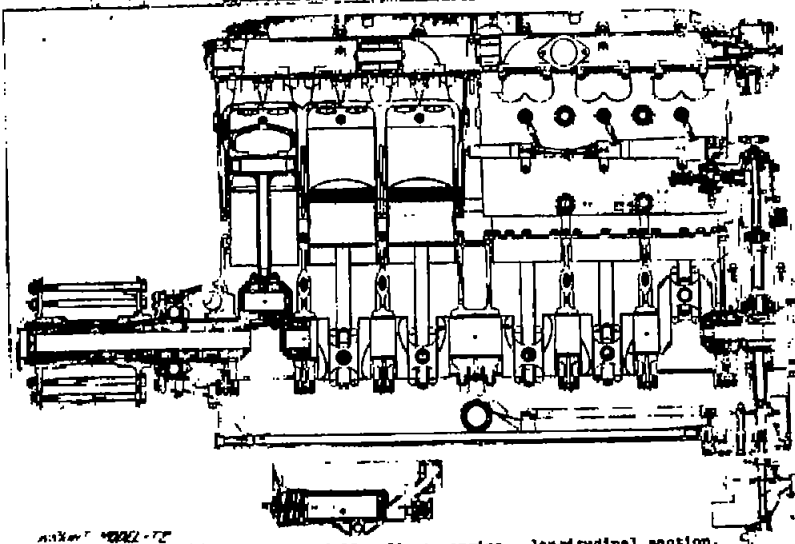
Wright T-3 12-cylinder engine - longitudinal section.
